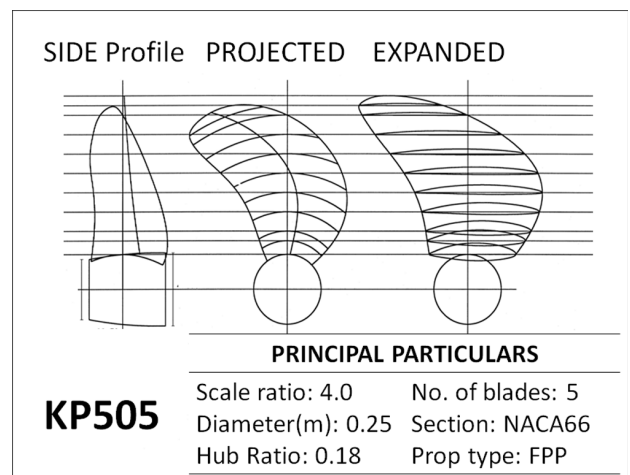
Blade profile and principal dimensions of KP505 propeller
